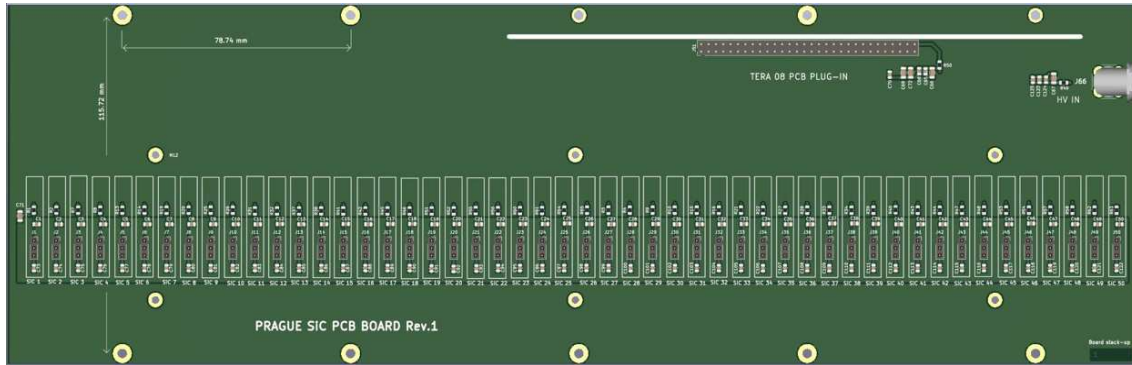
Top view of the PRAGUE SiC PCB Board (390x122.9 mm).
